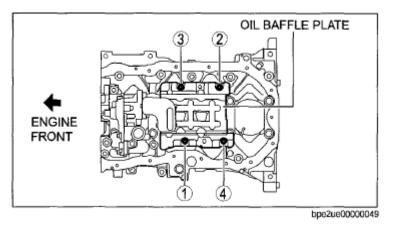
Assembling Order Of Cylinder Block Assembly (II) With Torque Specification
